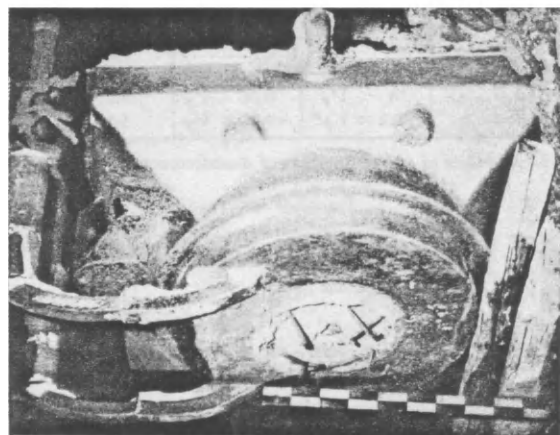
b. Horizontal sinking of metal surface in a large exothermic feeder head, as a proof that the principles underlying the exothermic feeder head calculation are also valid for large castings.
